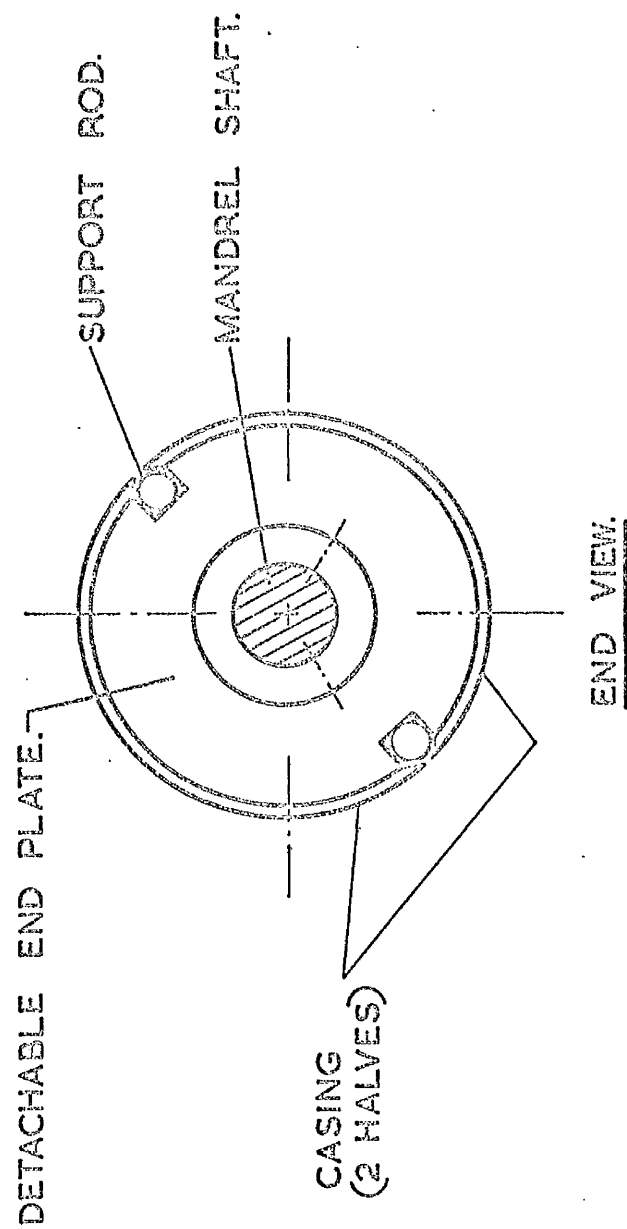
SPLIT MANDREL ASSEMBLY.
